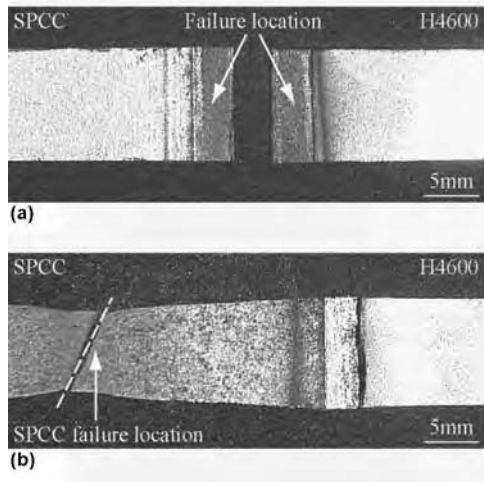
Tensile shear specimens from steel-titanium joint after laser roll welding. (a) Failure at interface. (b) Failure in base metal of SPCC
